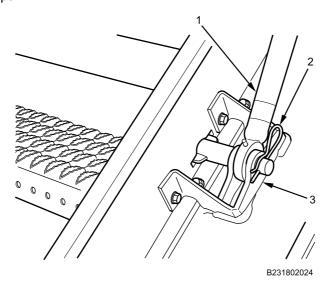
Hydraulic Cylinder Locking Safety Pin.
